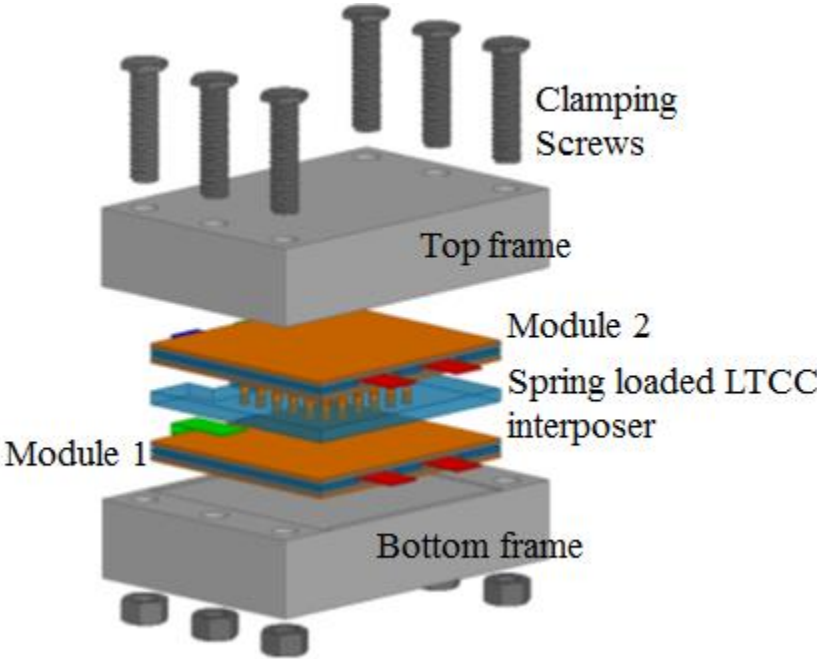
Exploded view of the 3-D stacked wire bondless power module
